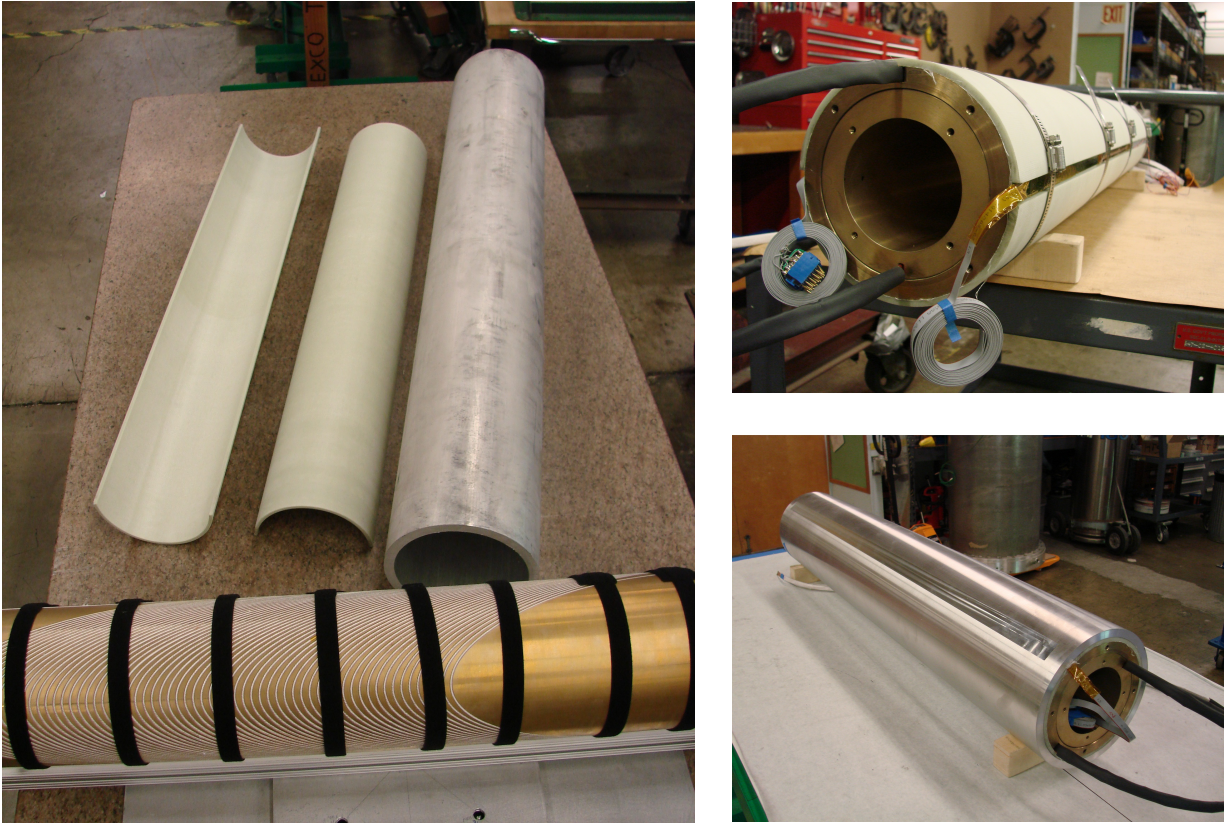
The assembly of coil pack into the outer aluminum shell is shown.
